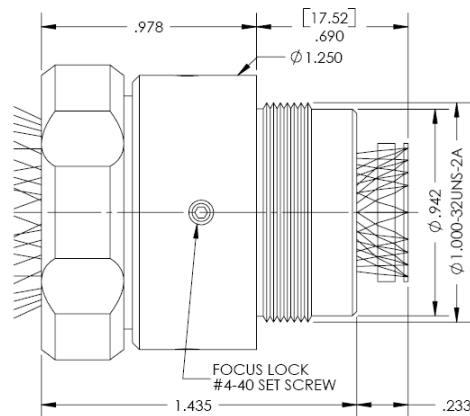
(b): Mechanical drawing of the StingRay lens. Dimensions are in inches. The volume of this lens is approximately 1.8 in³, or 29 cm³.
